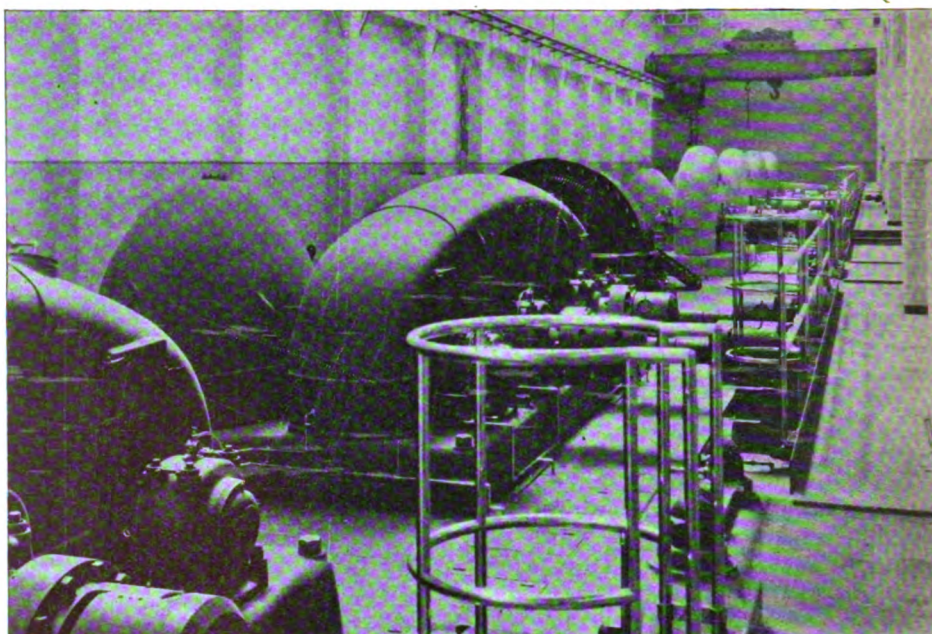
Motor room of the 42/32-in. blooming mill, showing the 8000-hp. mill motor, and the reducing gears and couplings between the motor and the different stands.
